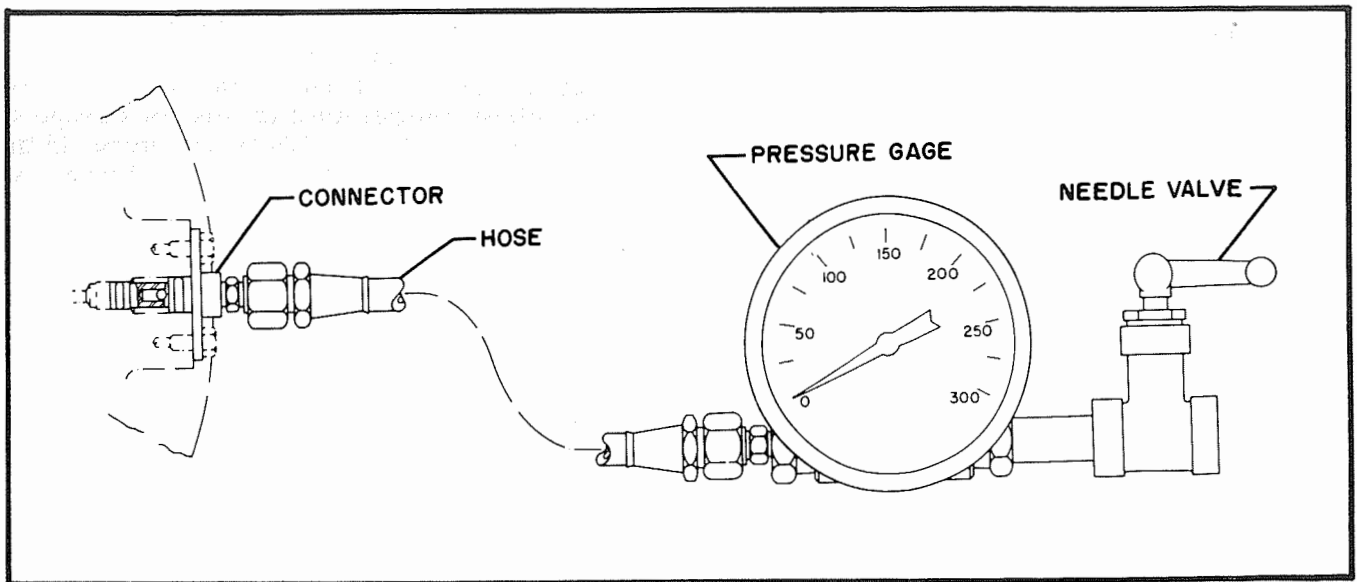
Torquemeter Oil Internal Tube Leakage Check
